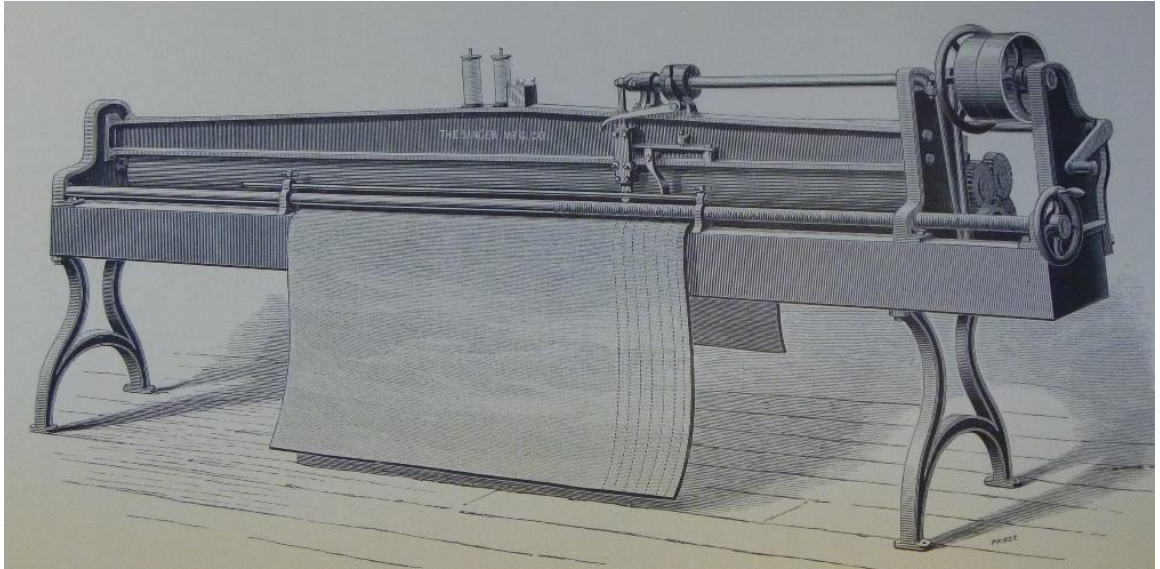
Model 9-1 for stitching wide conveyor belting, largest Singer machine ever constructed, *Catalogue of Singer Sewing Machines 1896* (NMAH Library)
